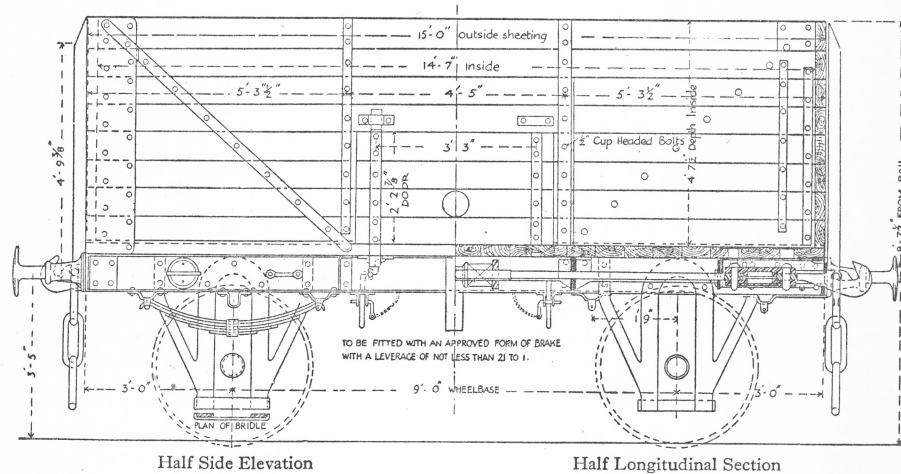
Standard Private Owners' 10-ton Wagon with Wood Body and Steel or Iron Underframe
